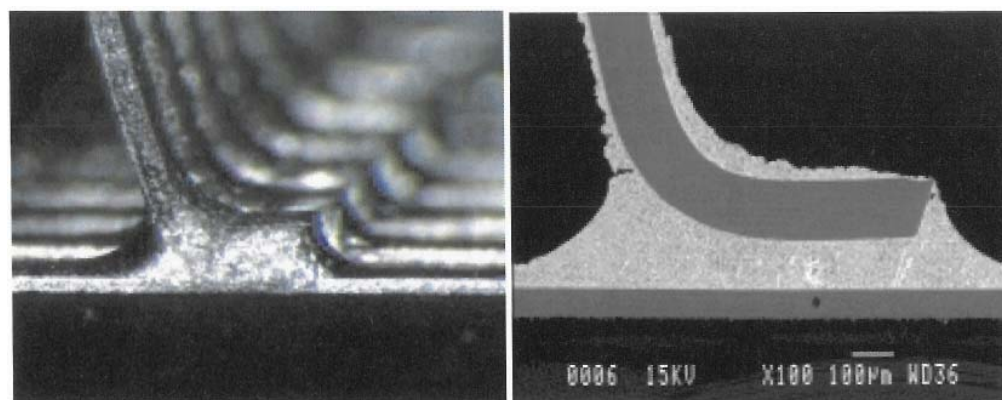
Appearance of solder joints after environmental reliability testing (left), and an SEM photograph of a microsectioned solder joint (right)
